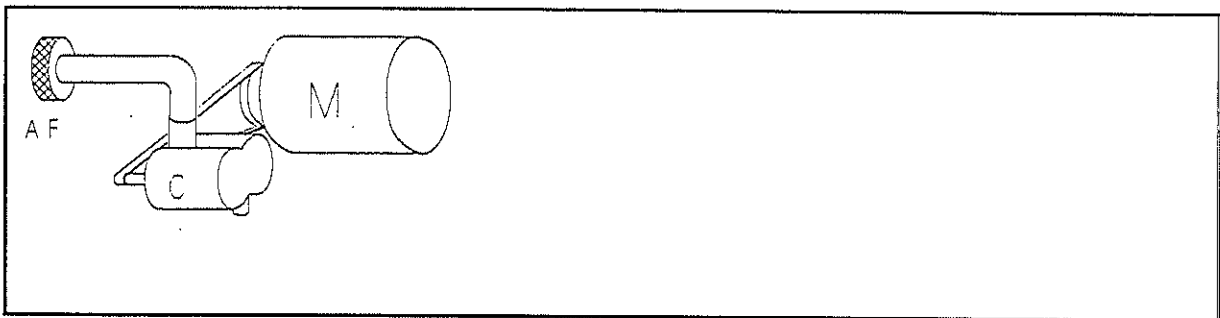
Air Filter (AF), Compressor (C), and Motor (M)
